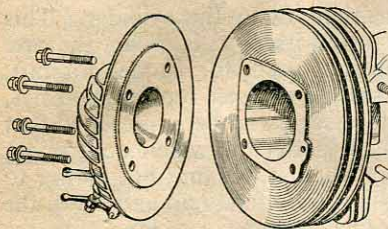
Detachable aluminium cylinder head of the Junior-de-luxe engine. The cylinder head fits straight on the cylinder barrel without any jointing medium. The fifth hole, the small one, is a passage leading from the compression-release valve to an exhaust port
